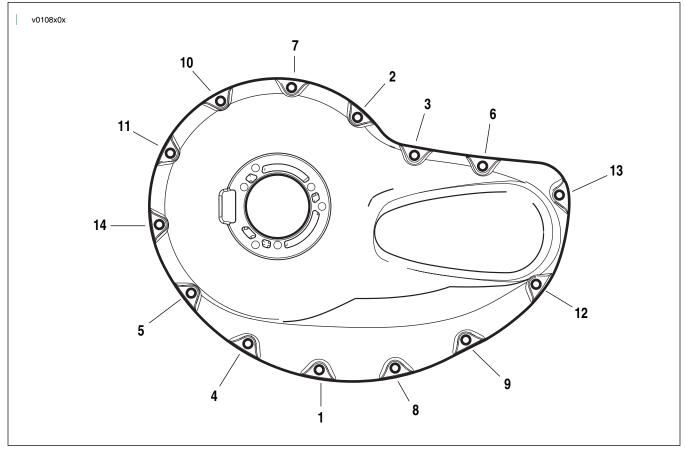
Clutch Side Crankcase Cover Torque Sequence @ 9.7 Nm (86 in-lbs)
